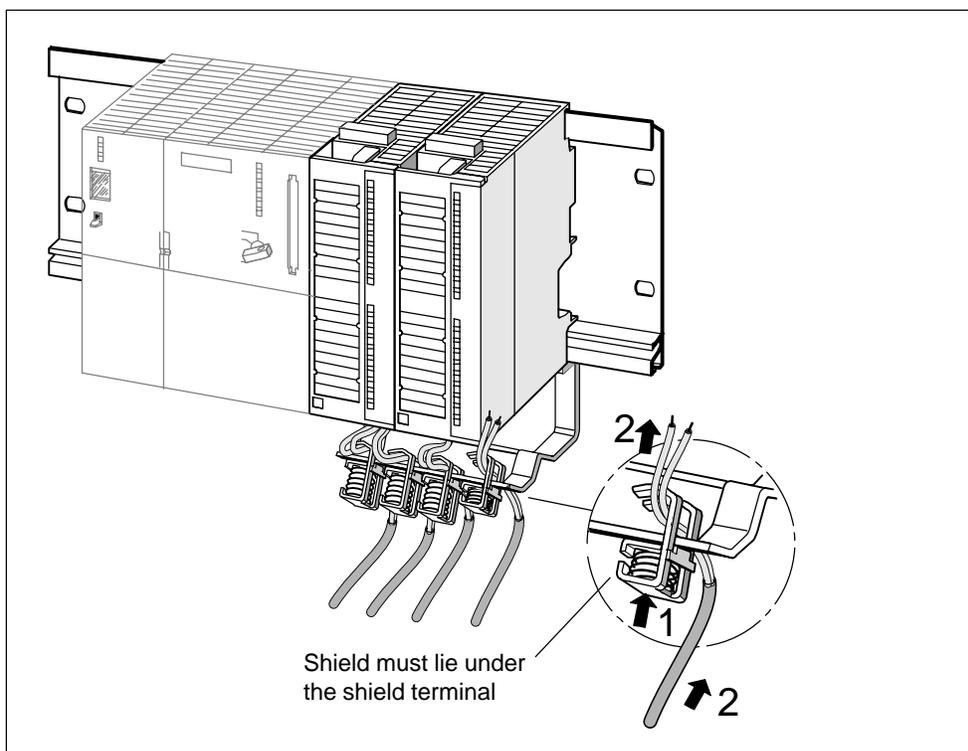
Attaching Shielded 2-Wire Cables to a Shield Contact Element
